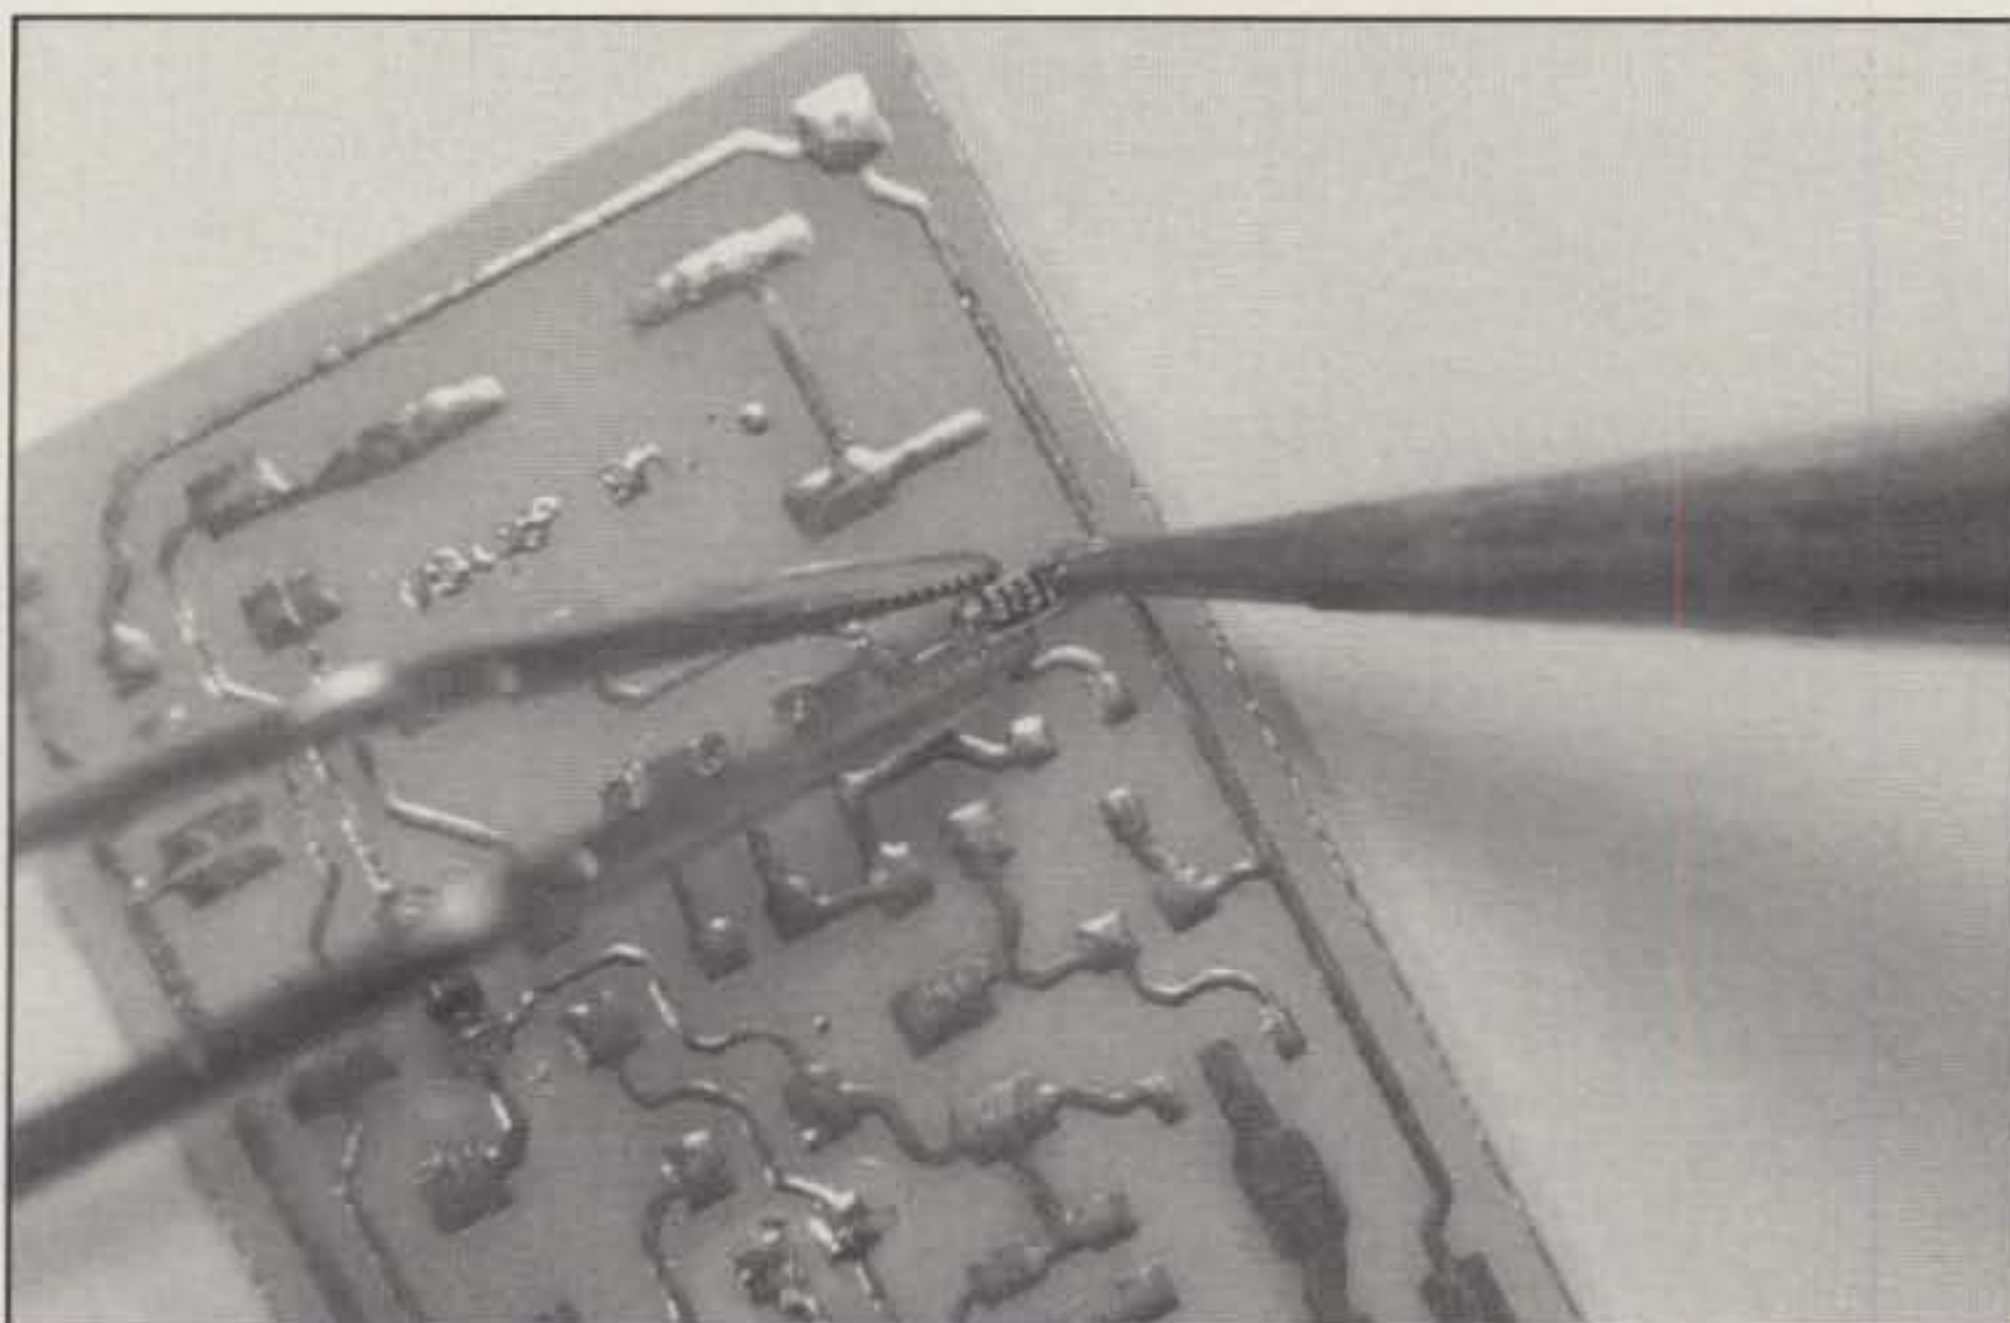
After solder-wetting another pad, Bob is holding another resistor (823, or 82 K ohms) in position while reheating a pad. Only a quick touch of the iron does it! After cooling, the other pad will be touch soldered. Then work will be checked with an ohmmeter as illustrated in photo 9.
